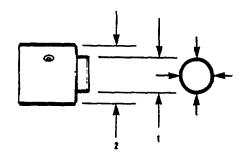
Camshaft Idler Shaft Measurement.
